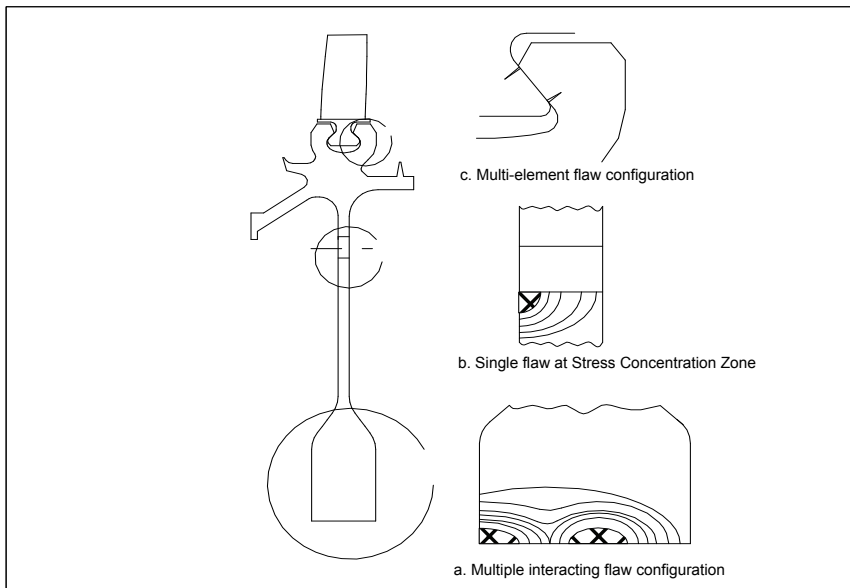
Schematic of initial flaws in the compressor bladed-disk assembly
